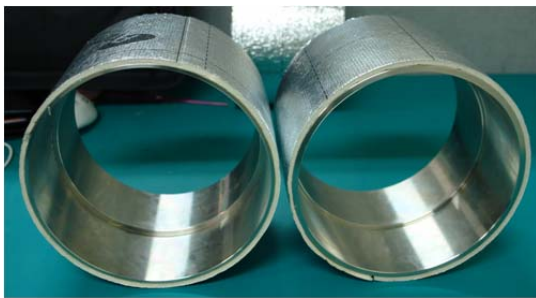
LNG Plant Insulated pipe Mock-up specimens
